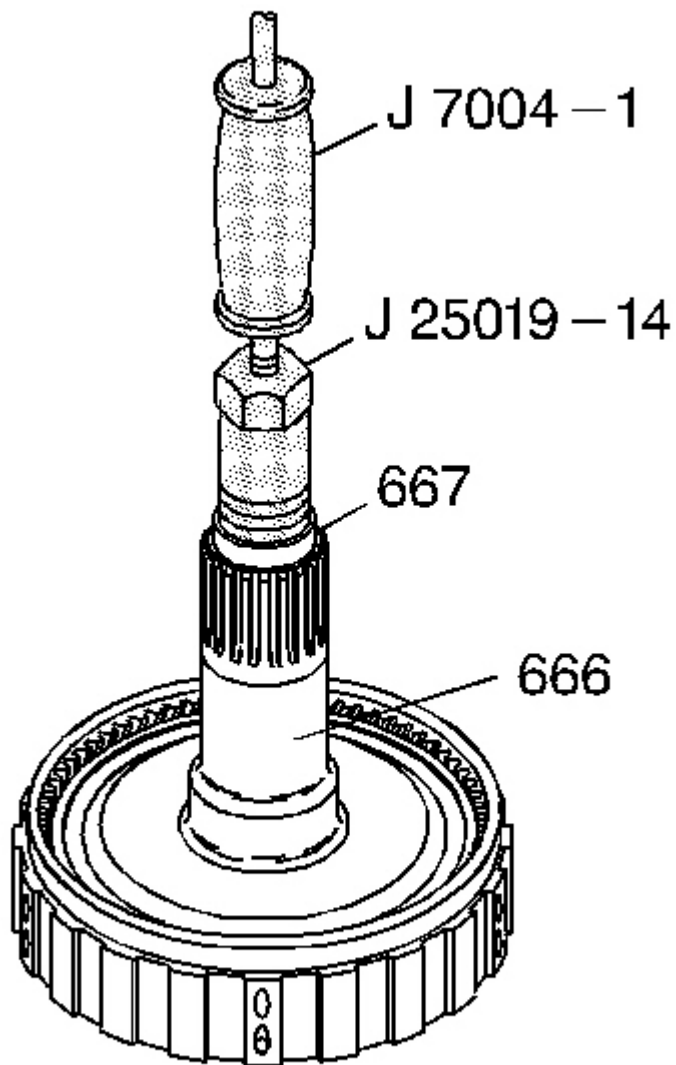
Using J 25019-14 & J 25019-14 To Remove Reaction Carrier Shaft Rear Bushing
